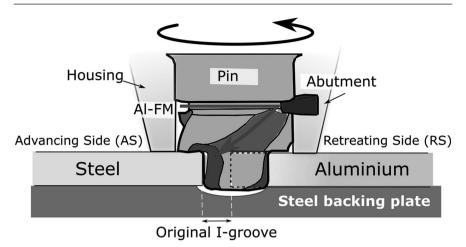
Illustration of a possible experimental set-up during aluminum-steel butt welding using the HYB PinPoint extruder [18].
